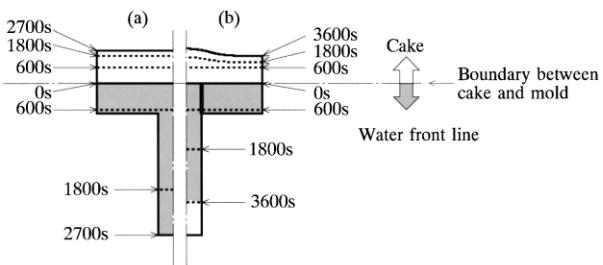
Cake growth patterns calculated by computer simulations in slip casting using T-shaped molds having a single part (a) and three parts (b).
